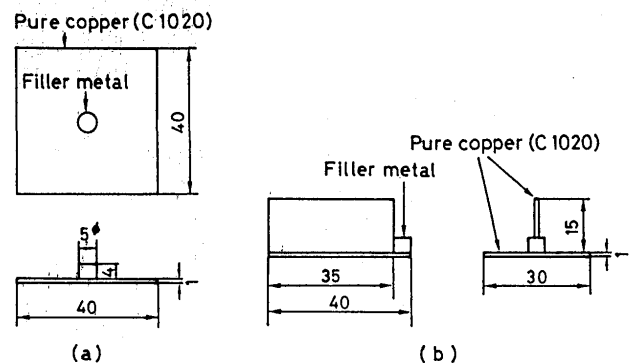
Shape and size of brazing filler metal and pure copper base metal for spreading test (a), and for fillet formation test (b).
